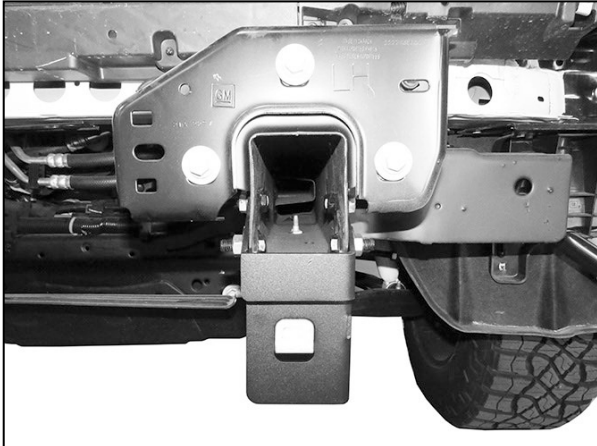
Remove tow hooks from end of frame (driver/left side pictured)
